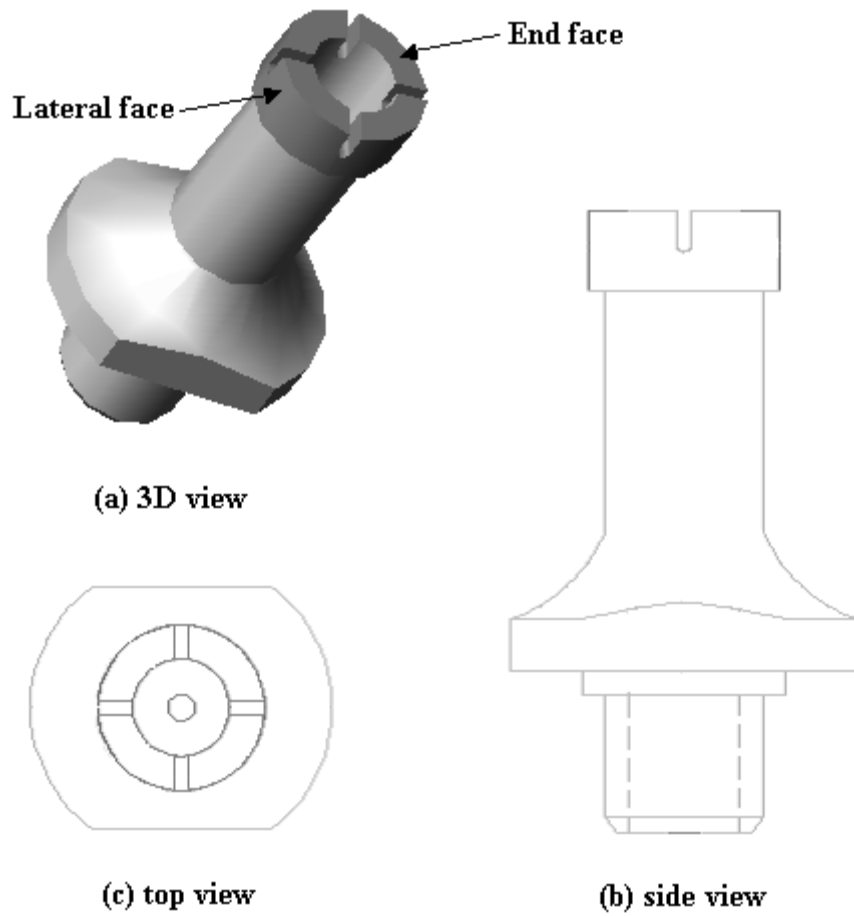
Illustration of the cutting tool for rotary ultrasonic machining.
